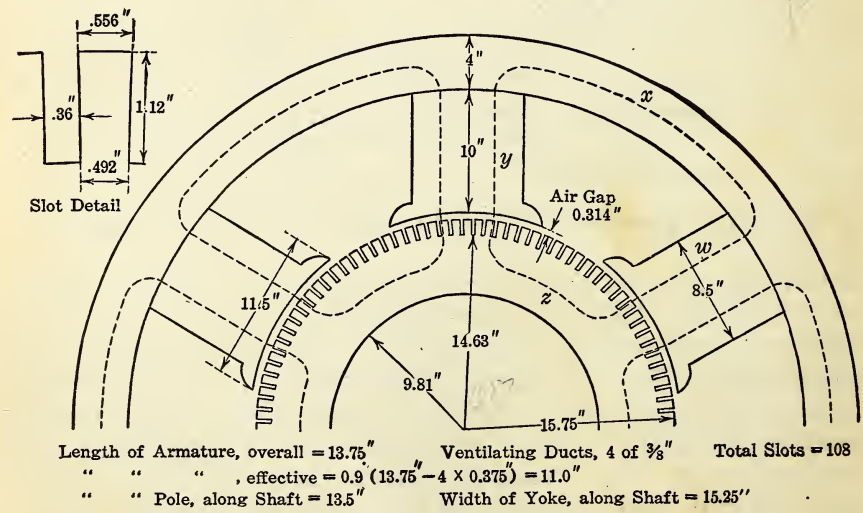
Giving the essential dimensions of the magnetic circuits of a multi-polar machine; this is the kind of a sketch the designer works from.
